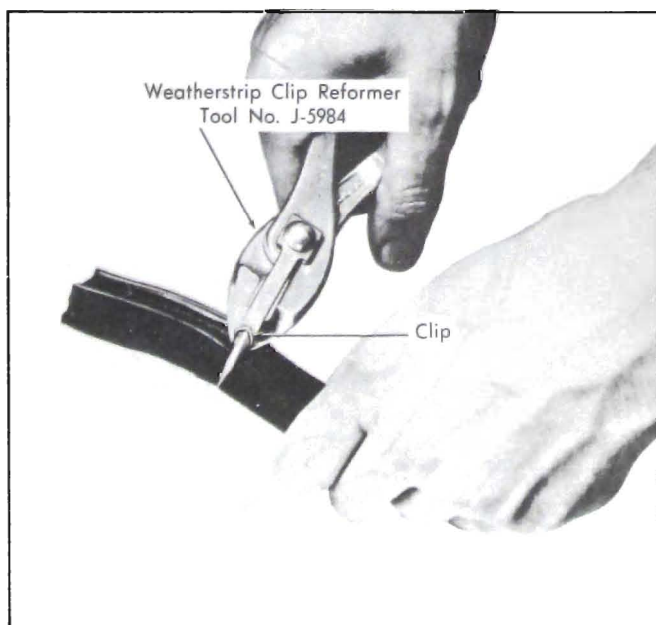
Weatherstrip Clip Reforming Tool
